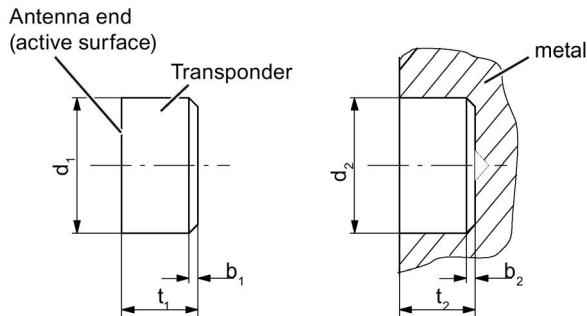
Flush-mounting of MDS D421/D521/E623 in metal with tools
